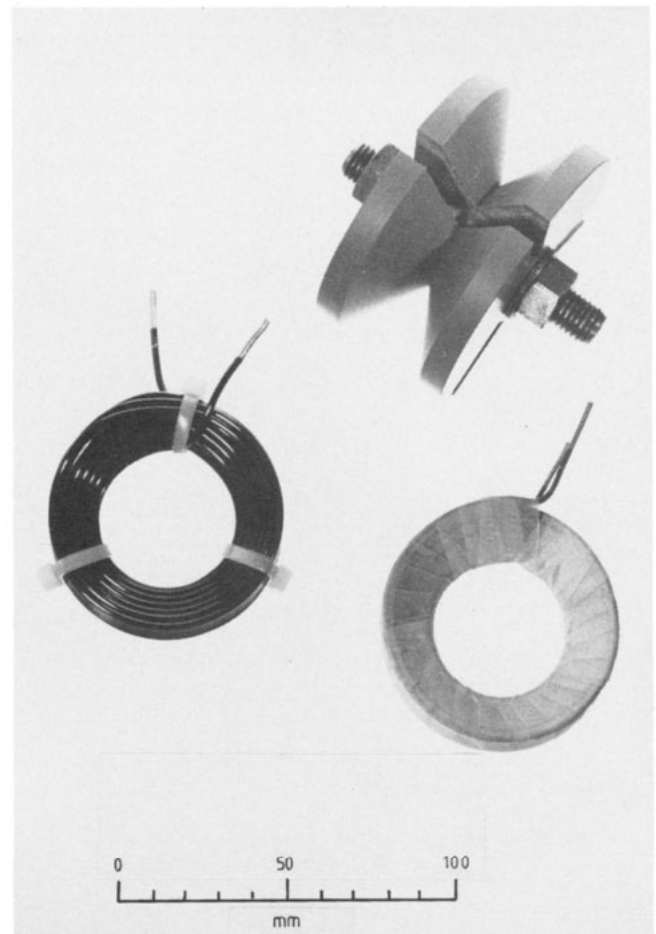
The single-size vee-shaped coil former, also showing coils after removal.
